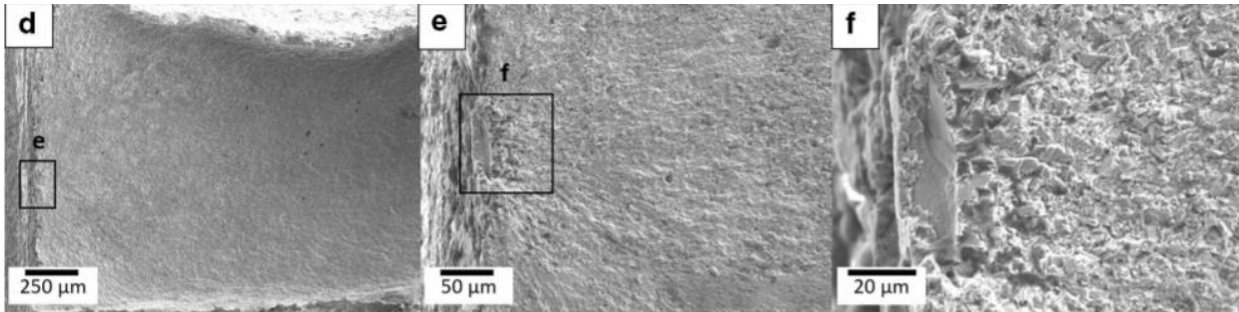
HCF fracture surface of as-deposited Inconel 625 fabricated using the MELD process [51].
